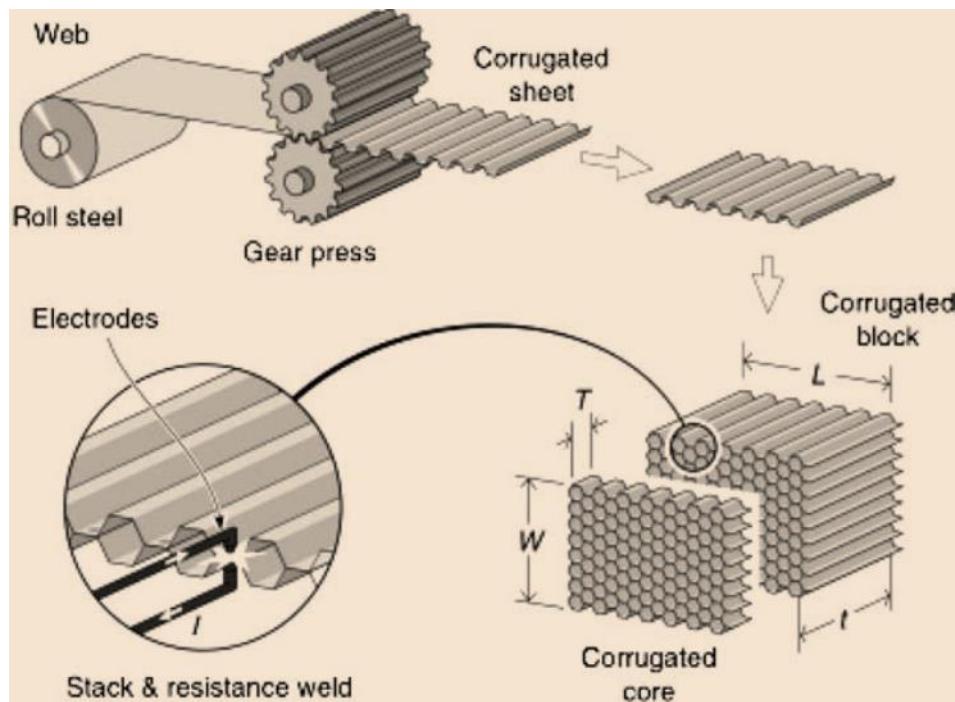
Low relative density metallic honeycomb cores for sandwich panels can be made by a sheet crimping process. The stacked sheets can be bonded by resistance welding (shown) or with an adhesive. The cores can be cut and adhesively bonded to face sheets to create sandwich panels [1].
